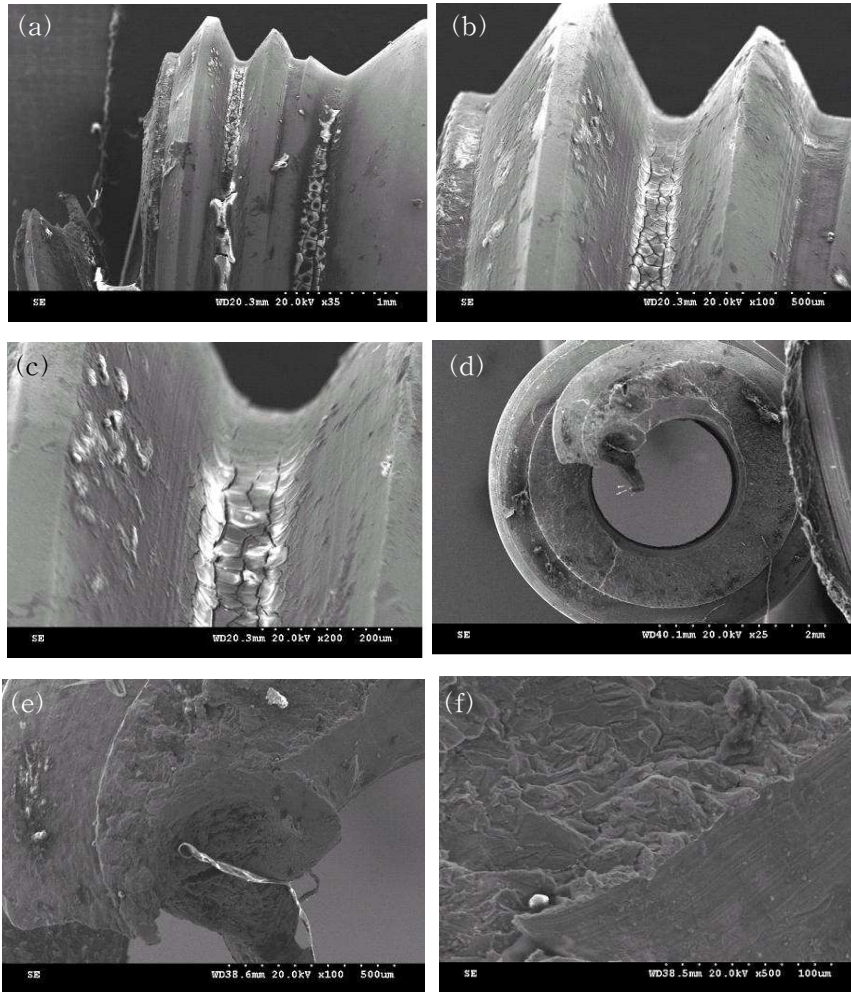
SEM showing the fractured surface morphology of 33 month used fixture.
